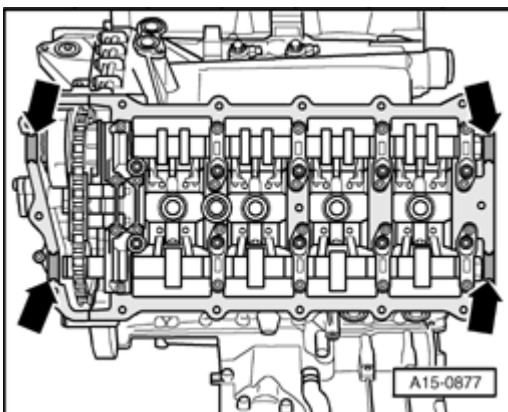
Coating Semicircular Seals Lightly With Oil And Insert
